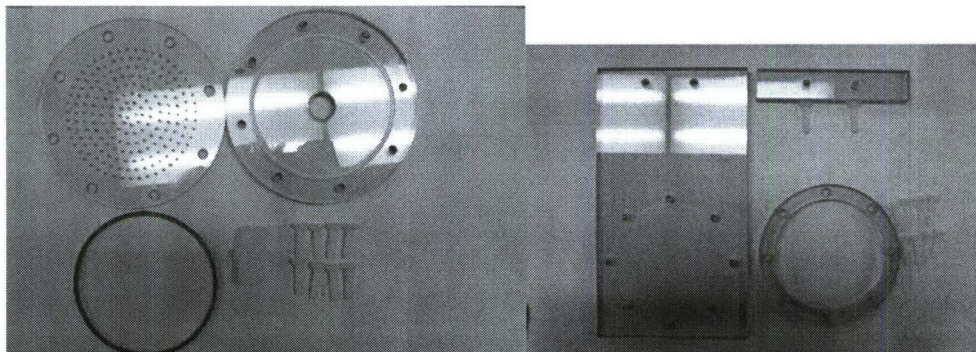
(Left) A CNC fabricated multi-Hole nozzle, (Right) A CNC fabricated electroplating wafer/sample holder
